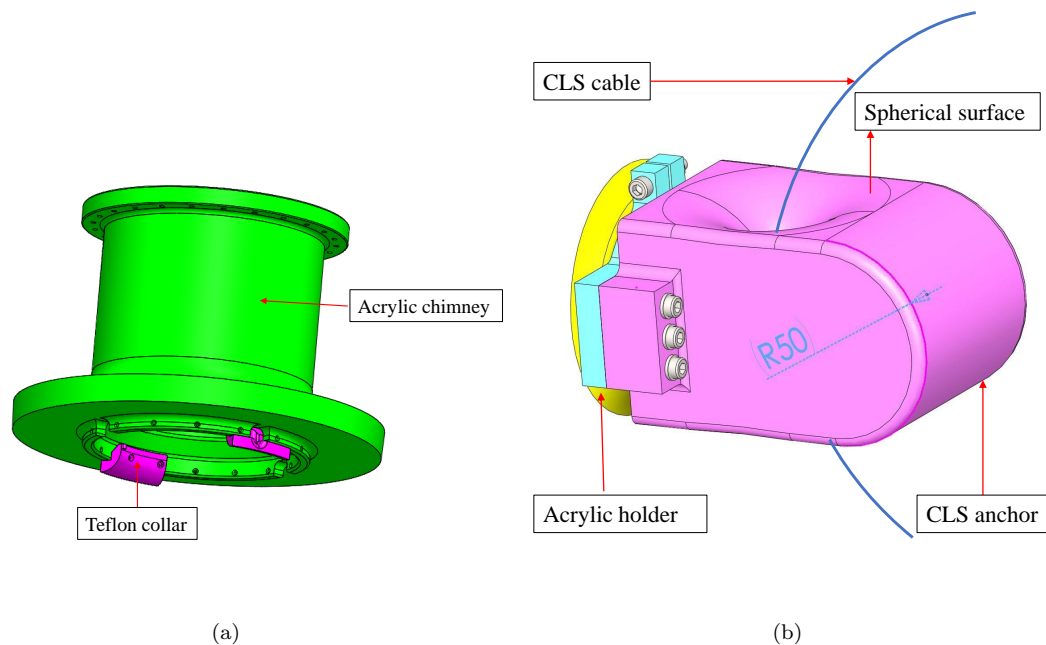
Design drawing of the chimney collars (a), mounted on the lowest segment of the CD chimney, and the CLS anchor with mounting fixture (b), the cable passes the anchor through a 1 mm hole.
